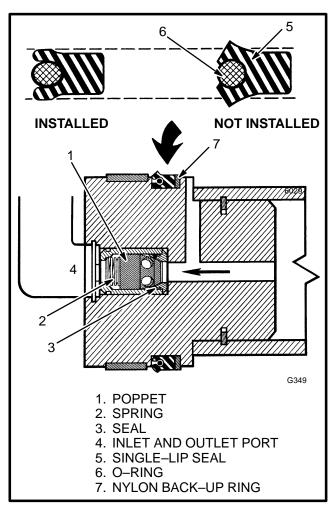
INTERNAL CHECK VALVE AND SINGLE–LIP SEAL
